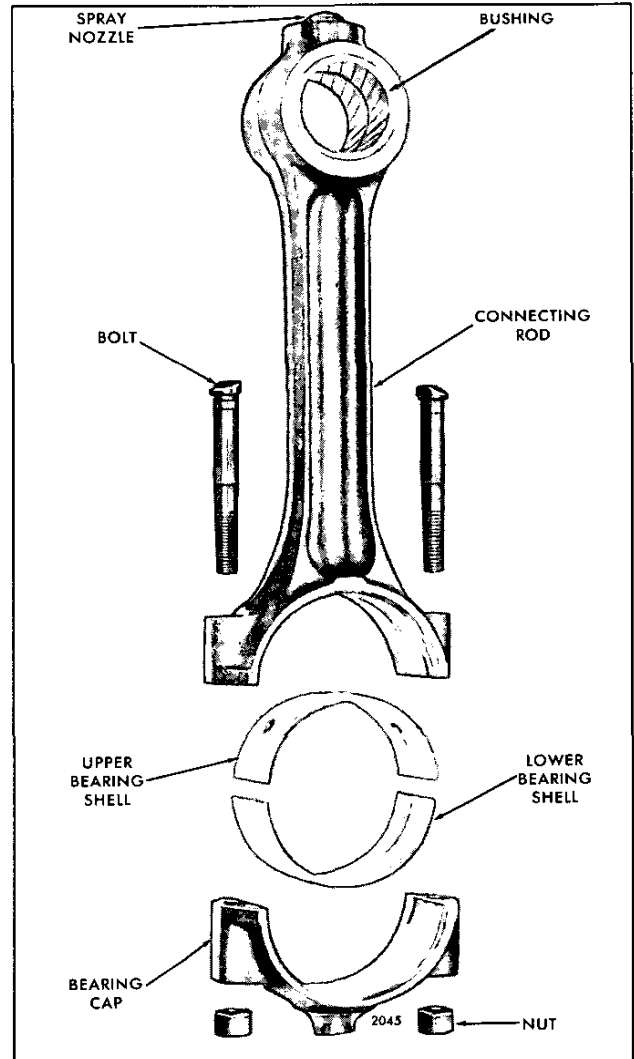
Connecting Rod Details and Relative Location of Parts
